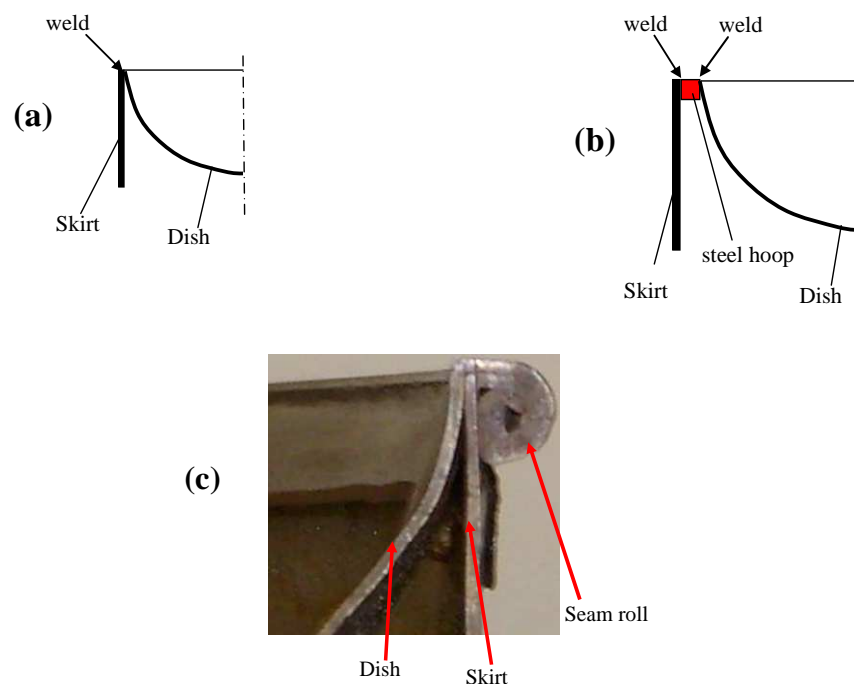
Joining methods in pans: (a) Minipan – dish is welded directly to skirt; (b) Full size pans: Dish and skirt are connected by a rigid mild steel hoop; (c) Seam roll of flanged edges in steel drum used to craft the Aubrapan
